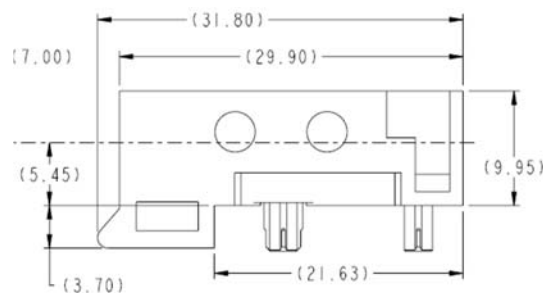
AirMax® 7.2mm R/A Guide Socket
